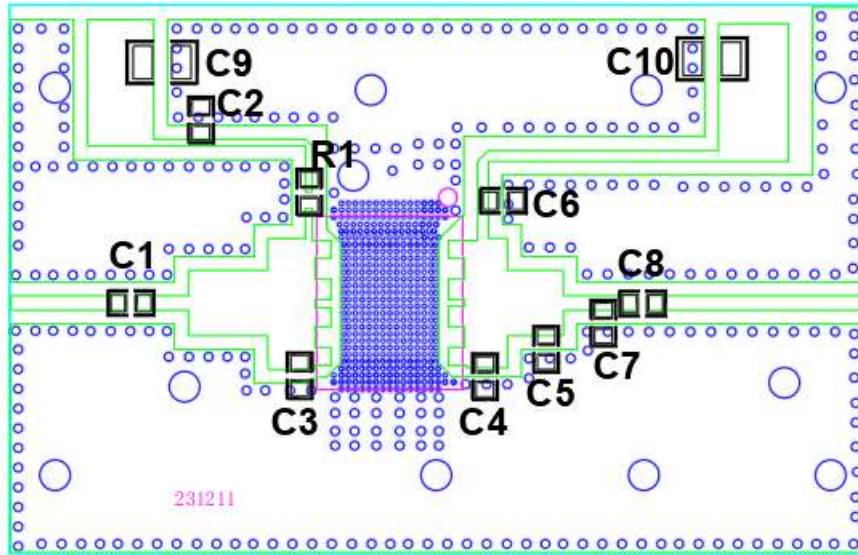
Test Circuit Component Layout, 20mils RO4350B
